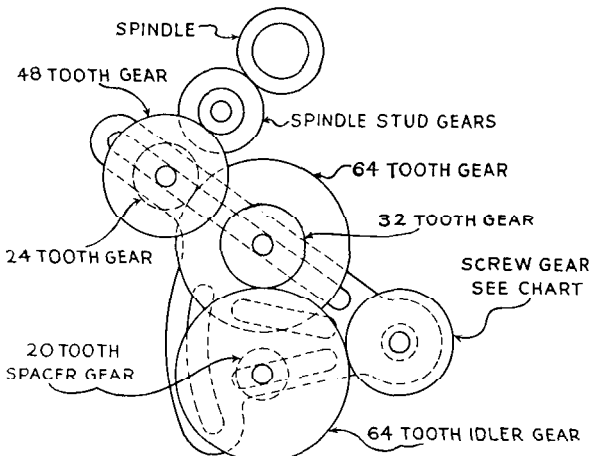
Gear set-up for 72 and 80 threads per inch.
